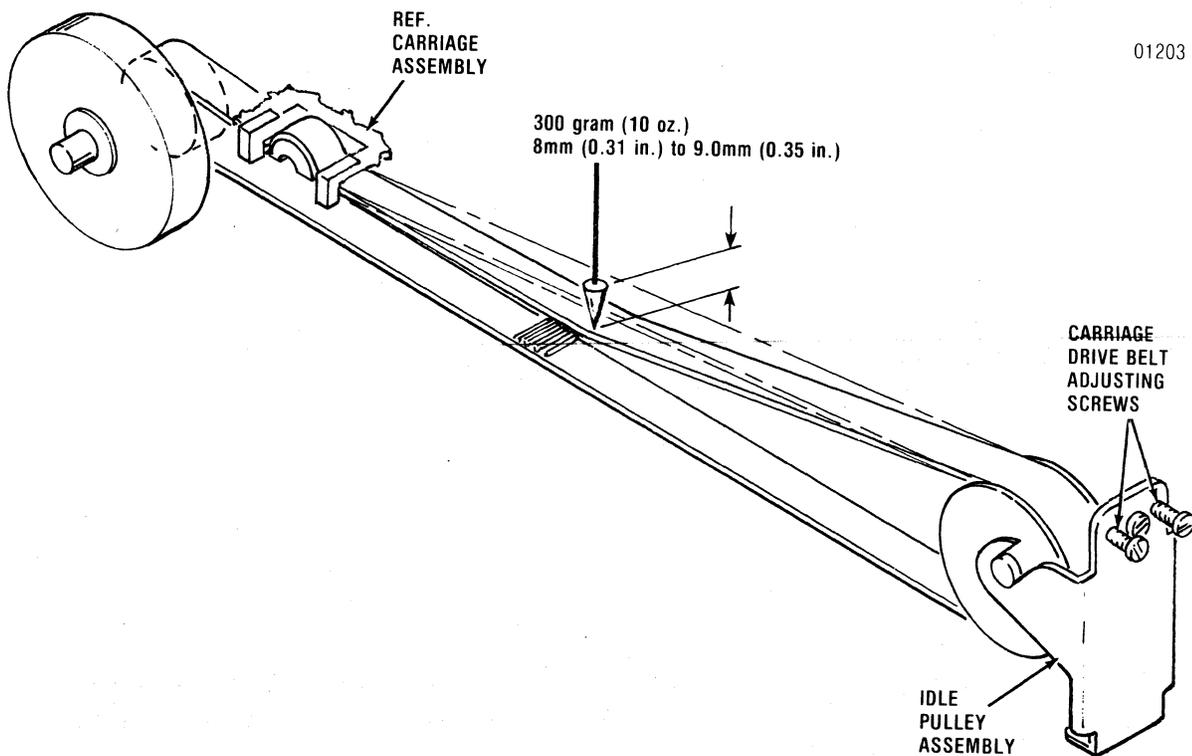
CARRIAGE DRIVE BELT ADJUSTMENT
